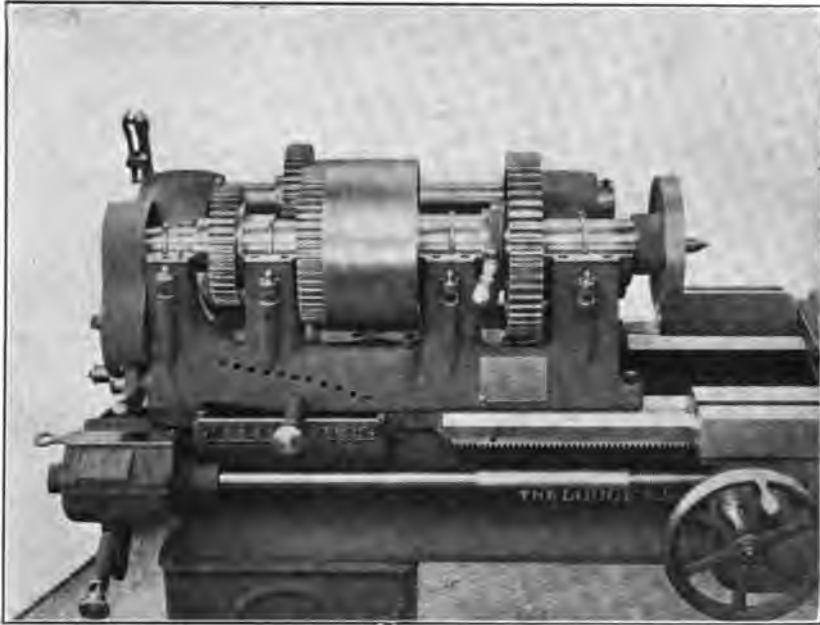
Lodge & Shipley single-face pulley drive in connection with gear box. Cover and bearing caps removed to show positive lubricating device.
